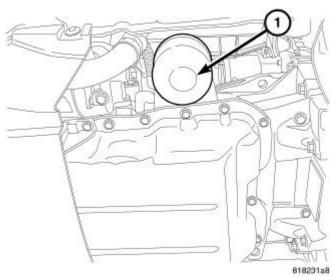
Oil Filter Courtesy of CHRYSLER GROUP, LLC
